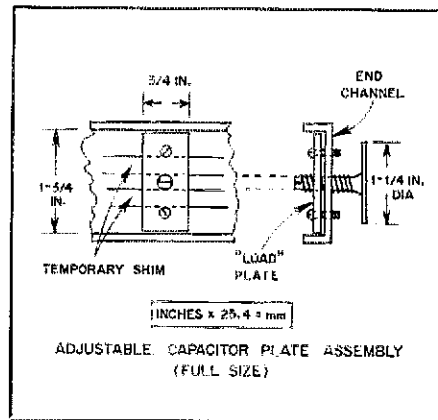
This drawing shows the assembly of the adjustable capacitor plate. The "loading" plate is provided to eliminate sloppiness in the capacitor plate adjusting the screw.
